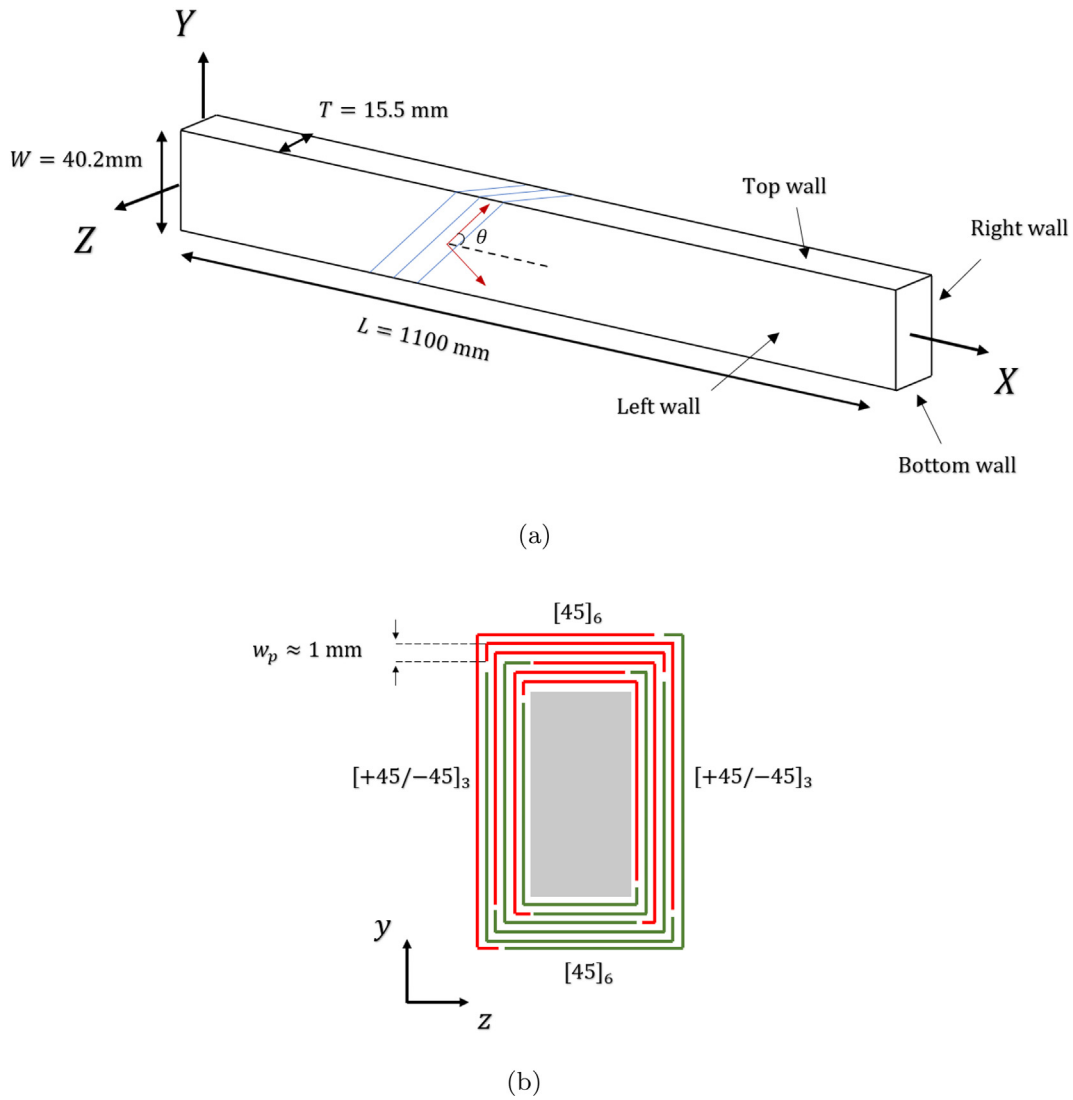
Schematic drawing of the specimen (a) geometry (b) layup configuration.
